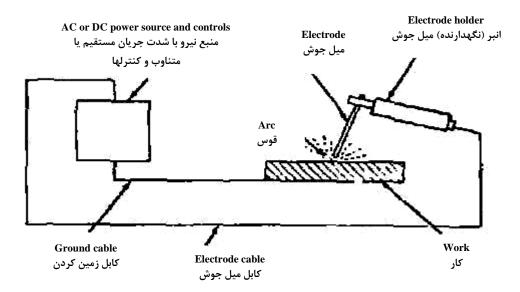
ELEMENTS OF A TYPICAL WELDING CIRCUIT FOR SHIELDED METAL ARC WELDING
